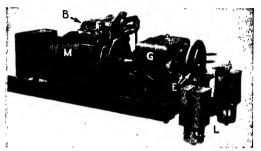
High-speed, electric door operator consisting of motor, brake, worm gear, two eccentrics, and limit switches.
